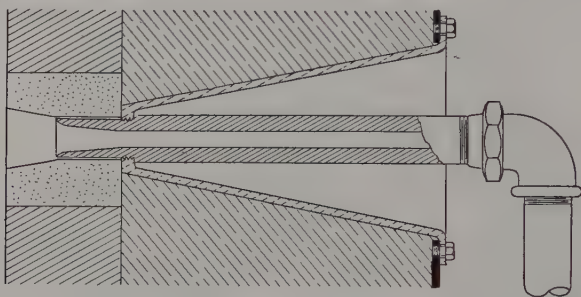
Burner port with thick-walled tube and open well for dissipating heat.
